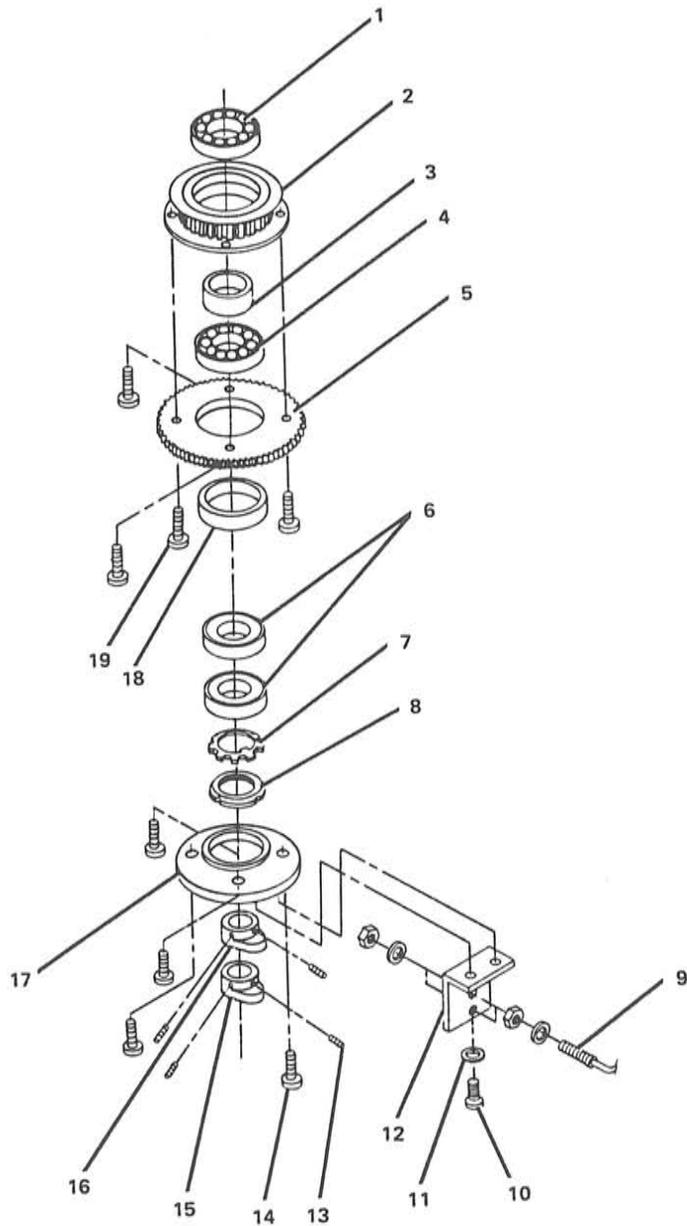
THETA ONE ASSEMBLY. SEE LIST 4.
